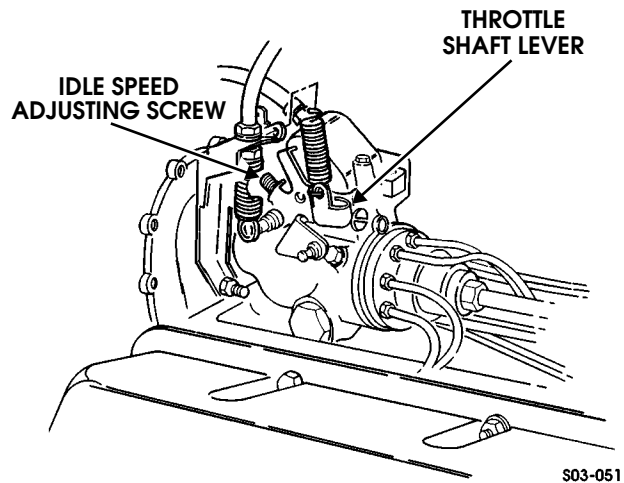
Idle Speed Adjusting Screw Location (NA Diesel)
